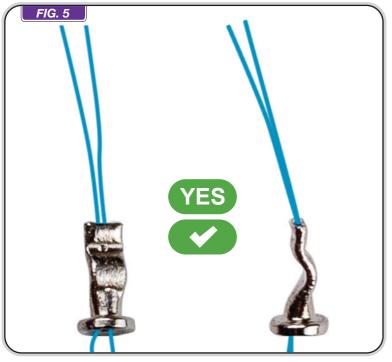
Front and side enlarged views of a correctly crimped fastener
